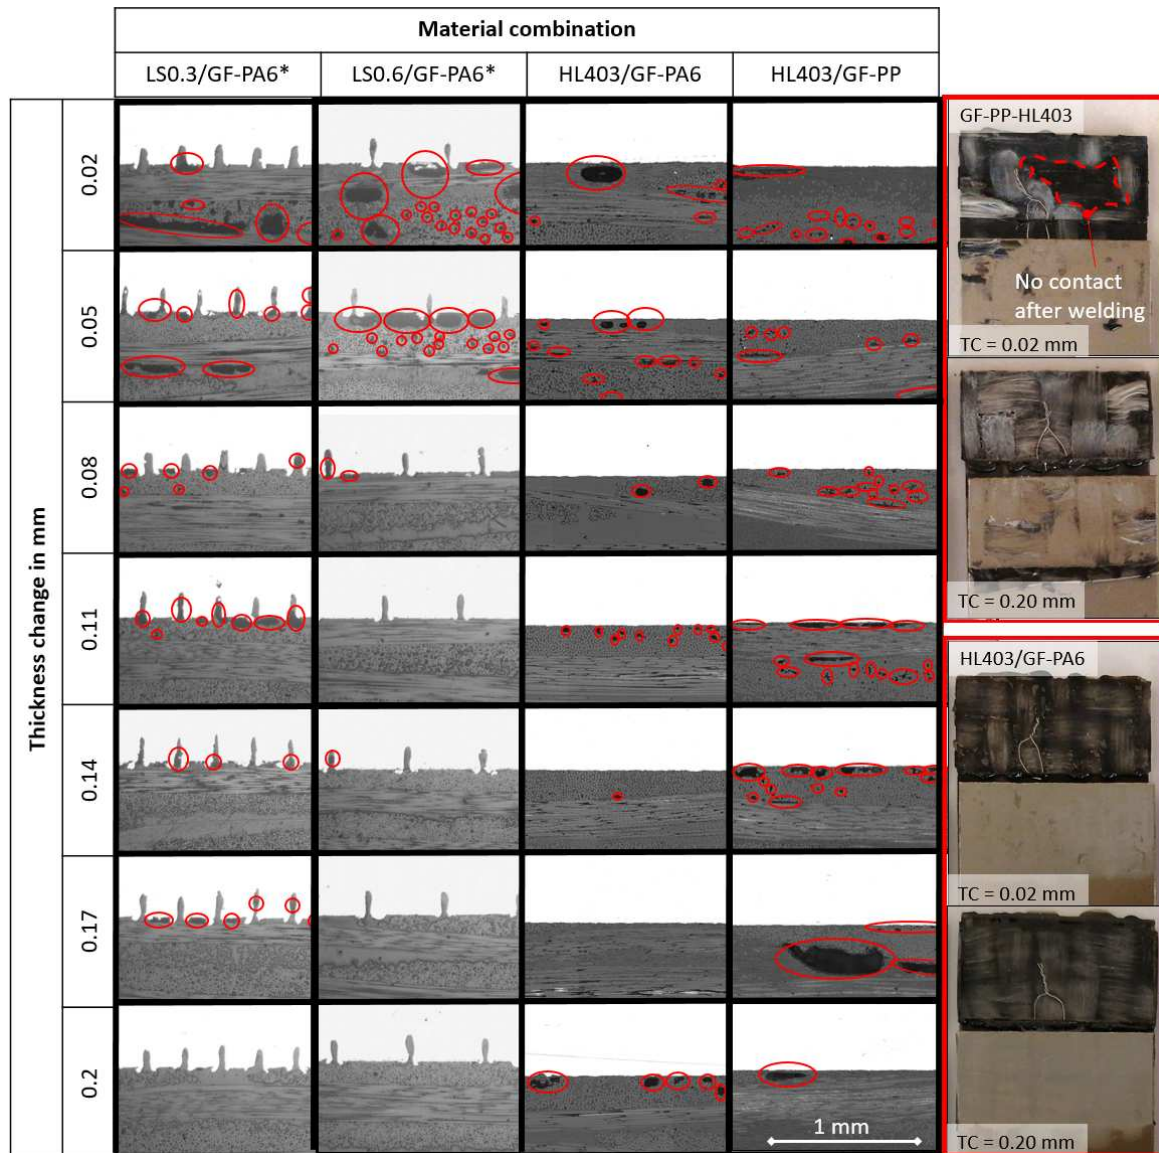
Micrographs of welded specimen at different TC and fractured surfaces after testing
